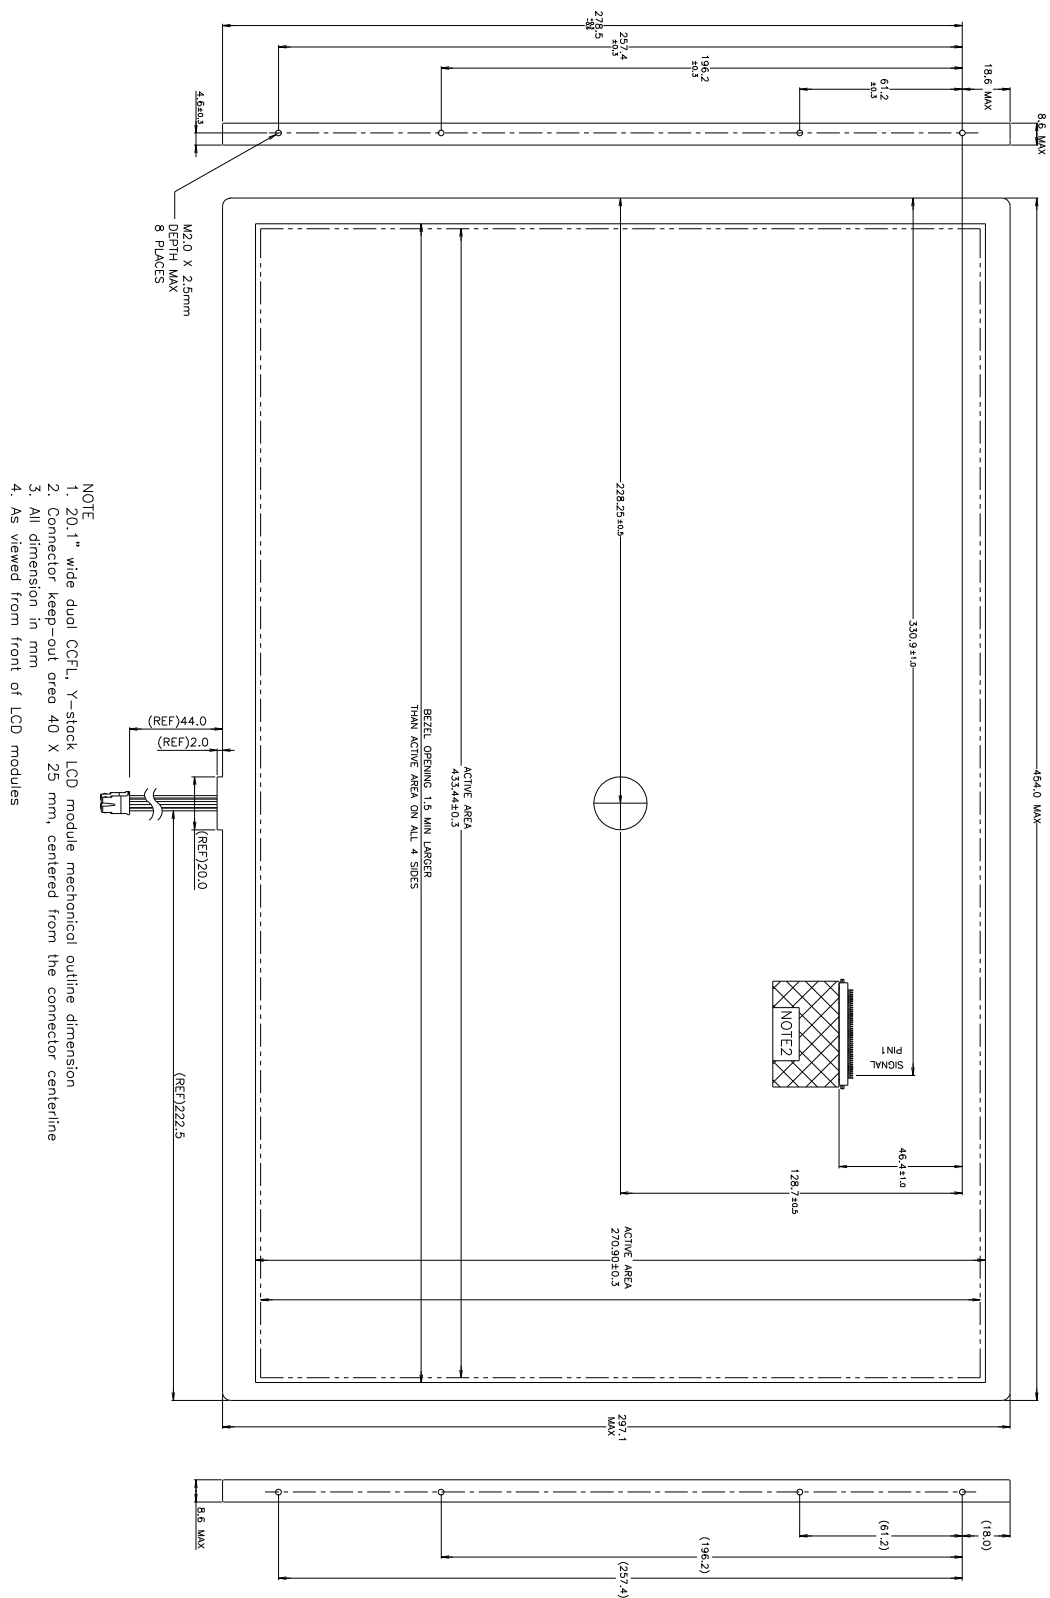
20.1-inc Wide Dual CCFL, Y-stack Mechanical Outline Dimension (Front View)
